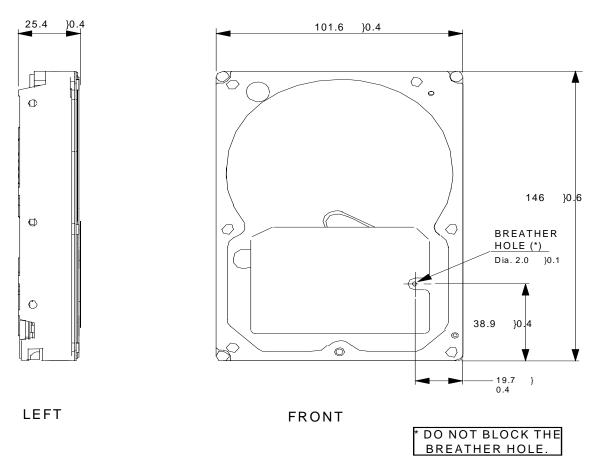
Top and side view of 120GB - 250GB models with mechanical dimensions
